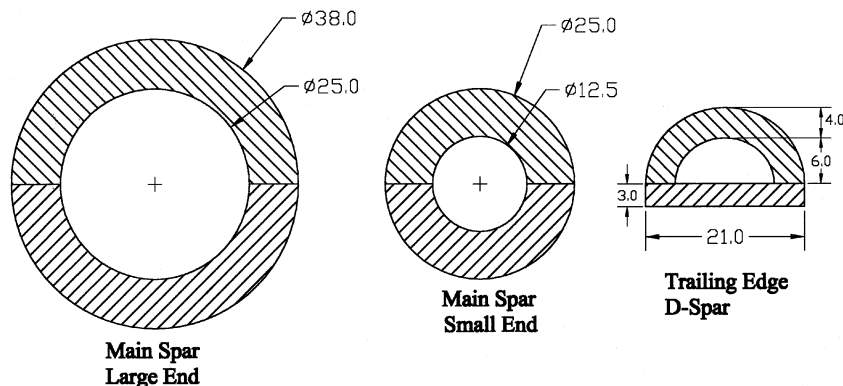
Spars and their cross sections, dimensions in millimeters.
